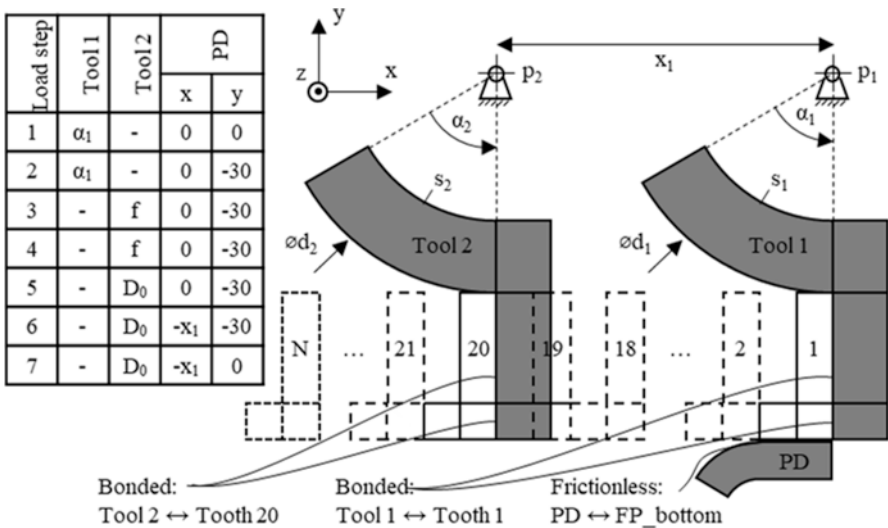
Simulation setup with two bending tools, one pressure die and the simplified flatpack
